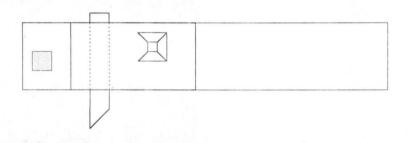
BORING BAR WITH INSERTED TOOL BIT
